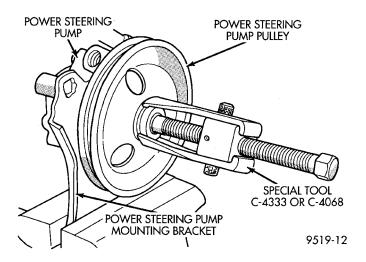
Pulley Removal From Power Steering Pump Shaft
